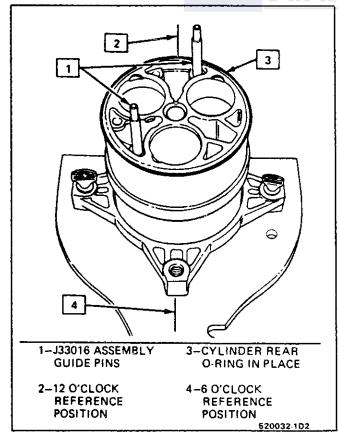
Assembly Guide Pins in Cylinder Assembly (Standard Head Position)
